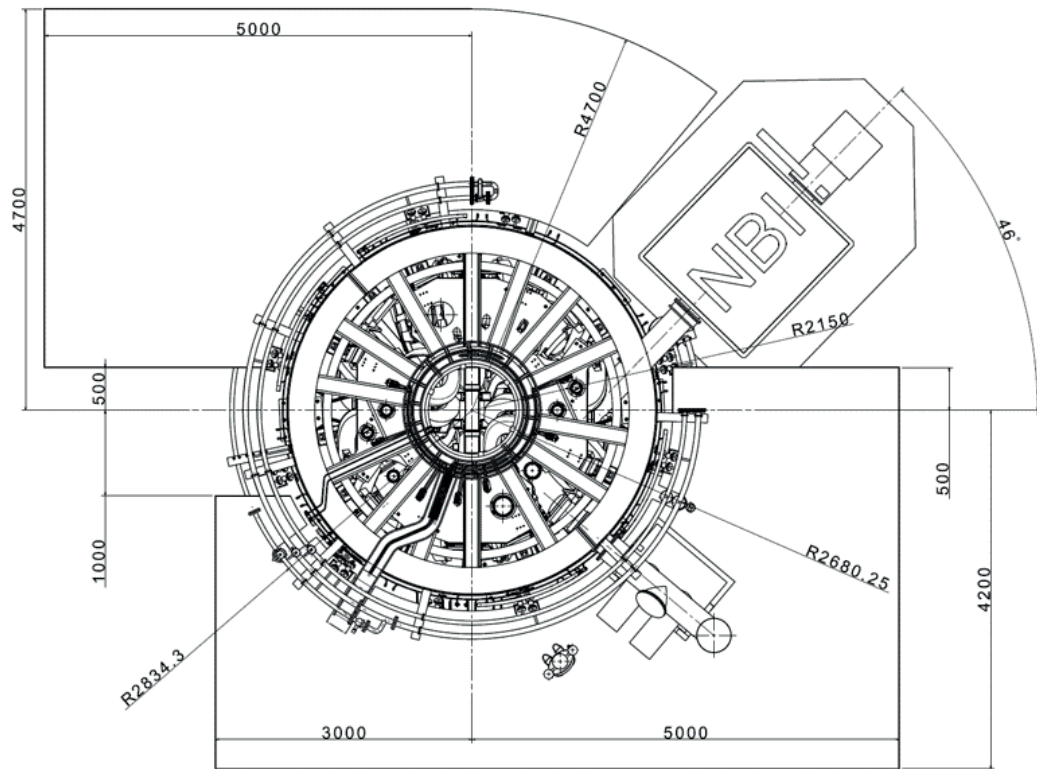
Top view of the CFQS. To install various equipment's around the CFQS body, the stages with a height of about 2.3 m and a width of about 10 m will be installed.
